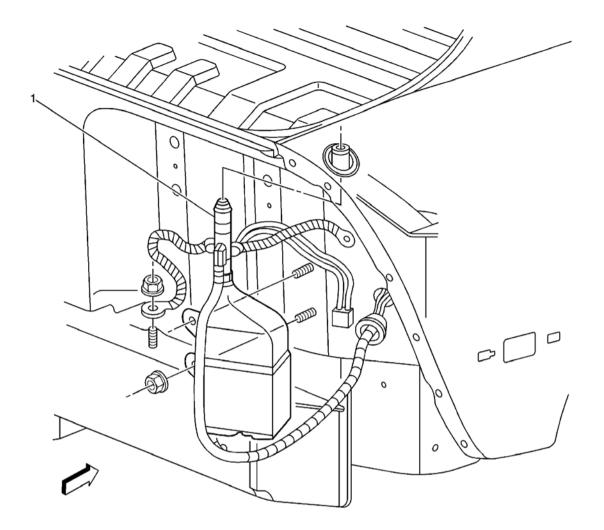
Rear Of The Vehicle Component View Courtesy of GENERAL MOTORS CORP.
